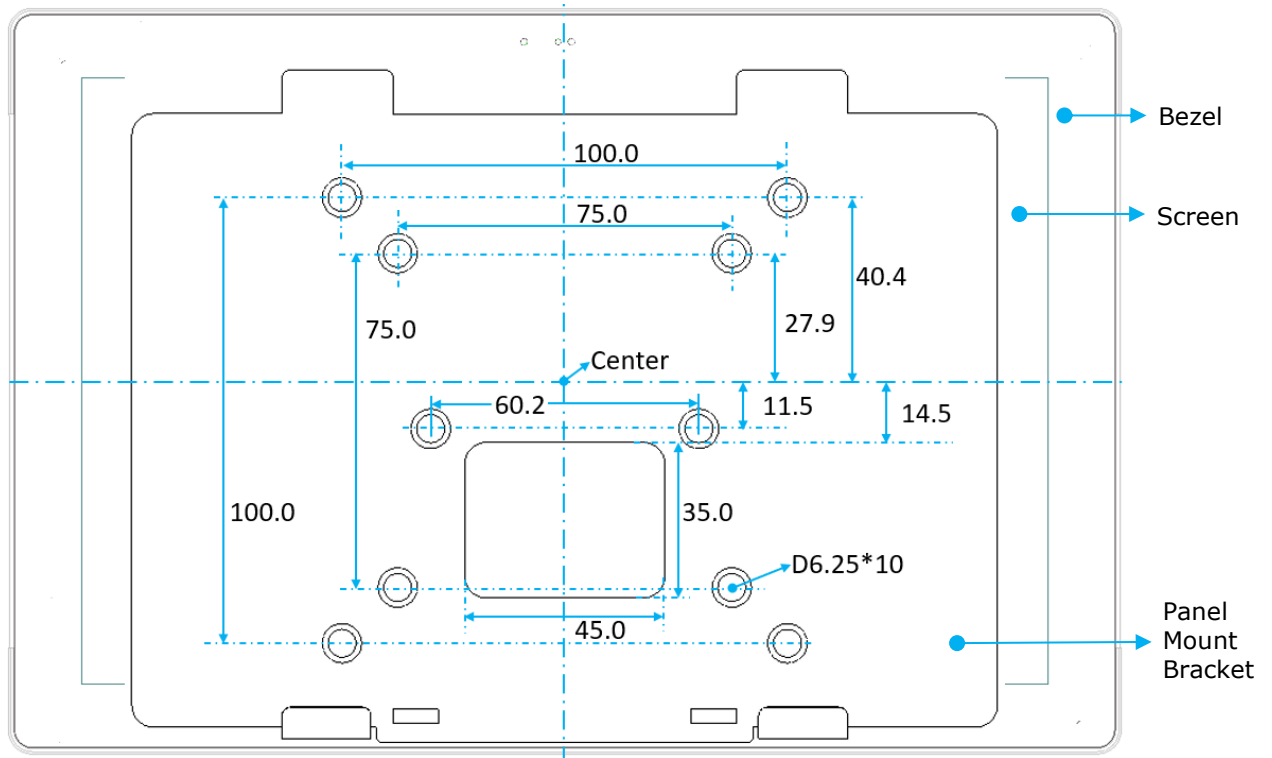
Panel Mount Bracket Drill Holes Drawings (Front View)
